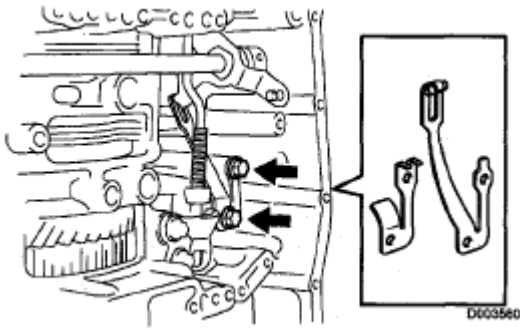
Locating Manual Detent Spring Sub-Assembly Bolts
